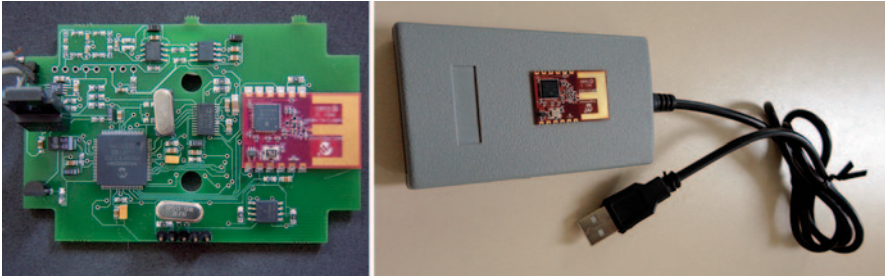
SAWARS Manufactured printed board and Host Zigbee modem
